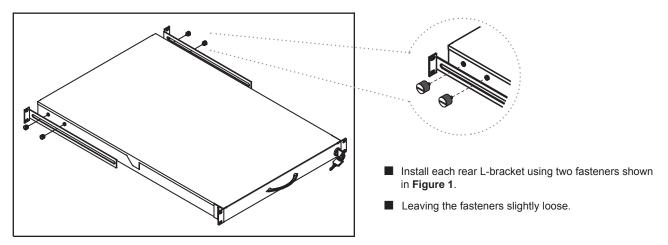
Installing the rear L-bracket to the LCD keyboard drawer.
